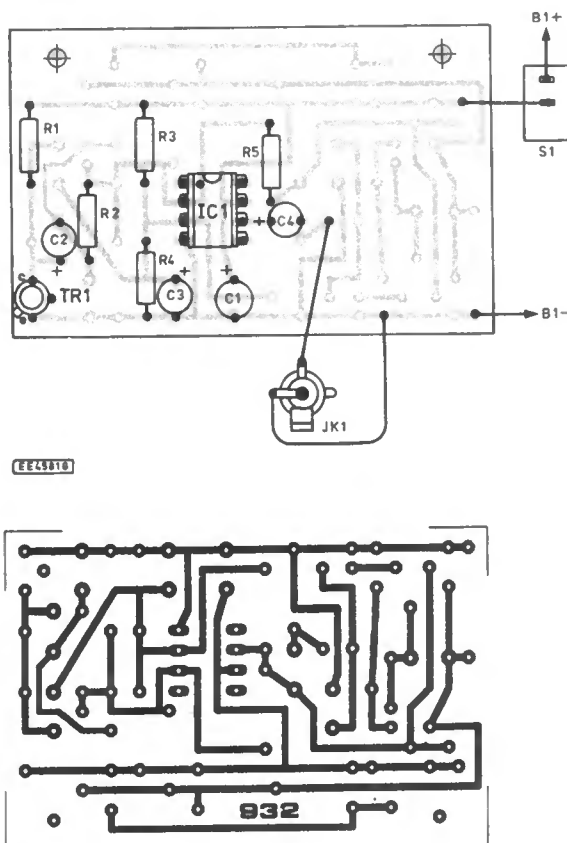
Receiver p.c.b. component layout and full size foil master pattern. An extra printed circuit board will be required for this project and can be purchased from the *EPE PCB Service*, code 932.
